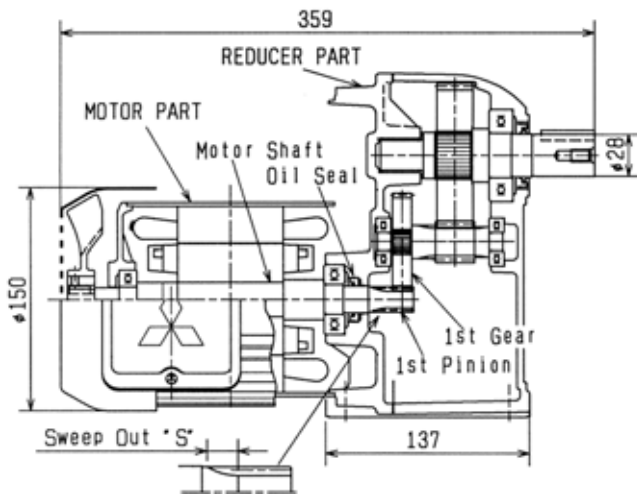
Typical Gear Motor Construction Drawing of Output 0.75kW and Reduction Ratio 1/40.
